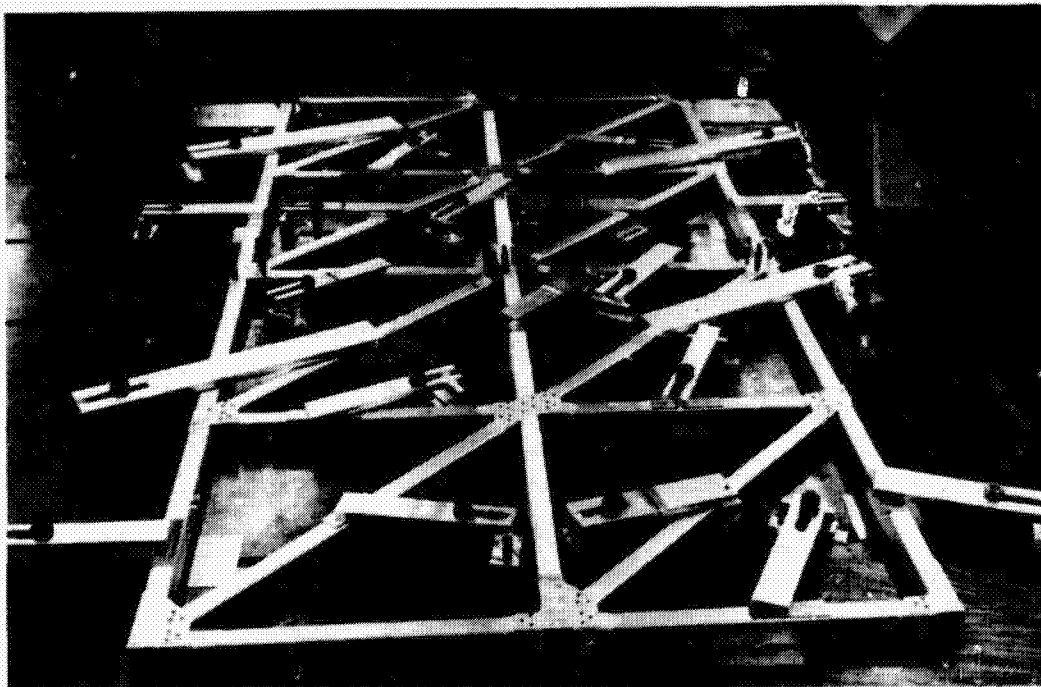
Aluminum Truss Stringer Weld-Bond
